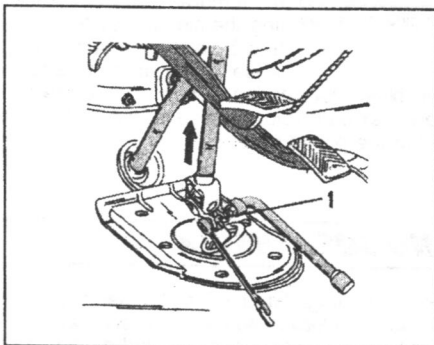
After slackening the nut and clamp bolt (1) and removing the bolt, push the steering shaft in the direction of the arrow to disengage it from the steering pinion. Tie the shaft to one side.
